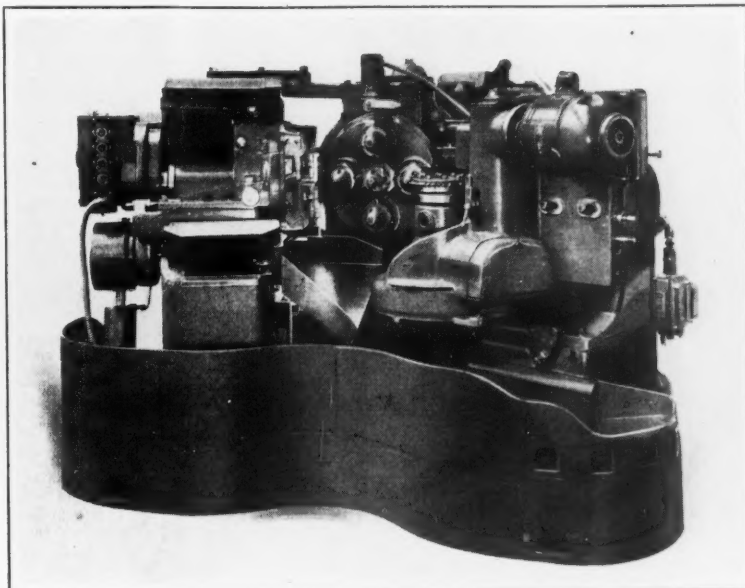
Gleason Generator which Roughs and Finishes Differential Gears and Pinions in One Operating Cycle
